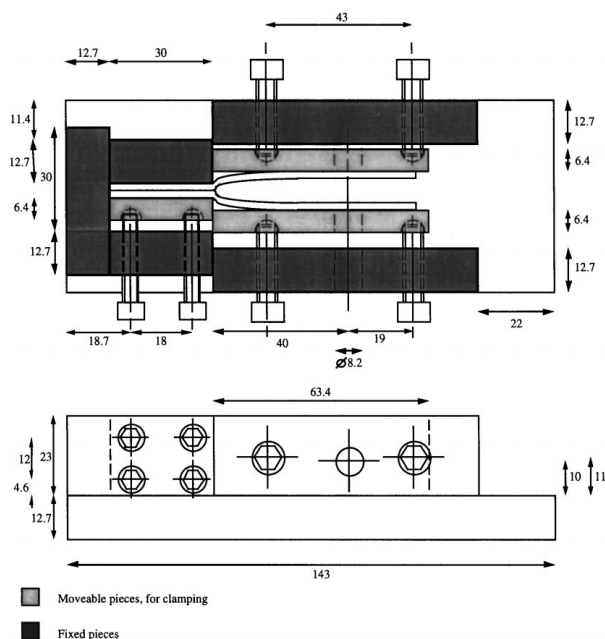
Forming jig used for Imperial College specimens. Dark shading on plan view indicates fixed pieces, and light shading indicates moveable pieces used for clamping. (All dimensions in millimetres.)
